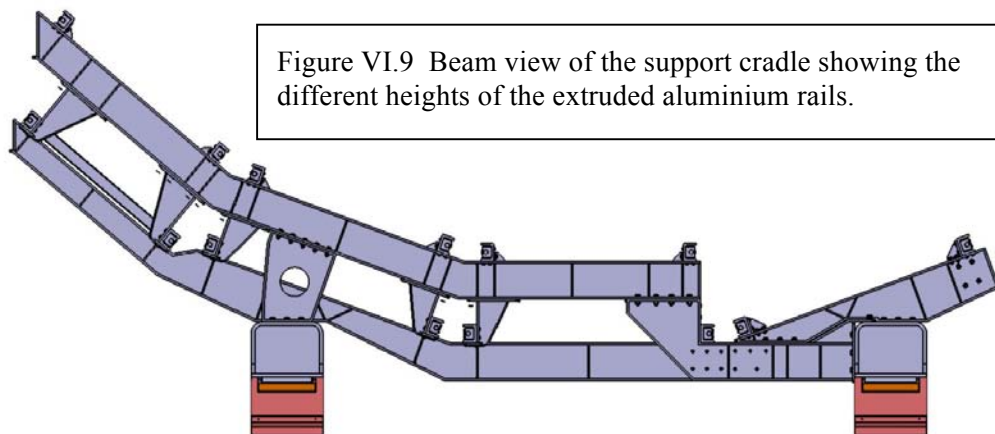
Beam view of the support cradle showing the different heights of the extruded aluminium rails.
